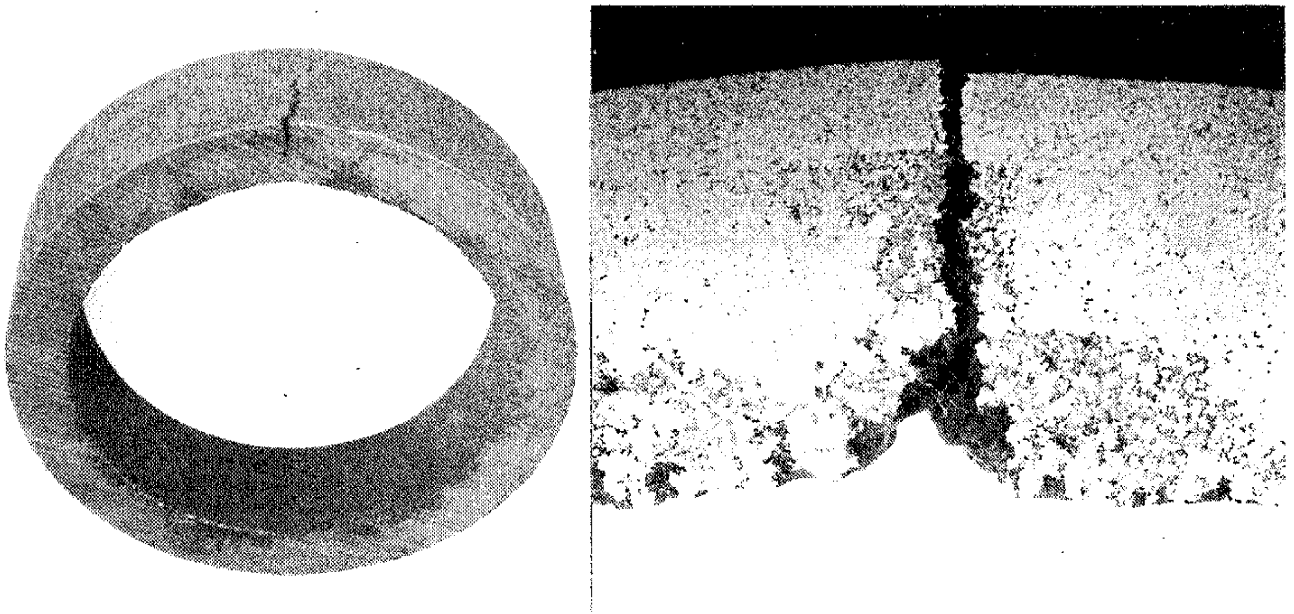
Cracking in 5-in. dia. by 1/2-in. wall HK-30 stainless steel reformer tube, caused by sigma phase formation. Failure occurred after 10 yr. of service at 1,340°F.
